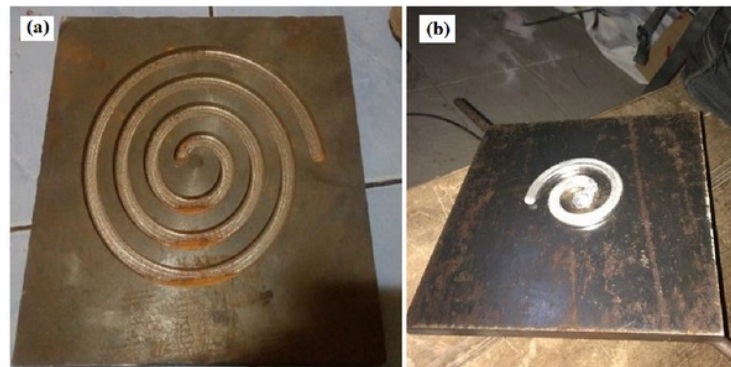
(a) The spiral permanent mold (b) spiral sand mold specimen
